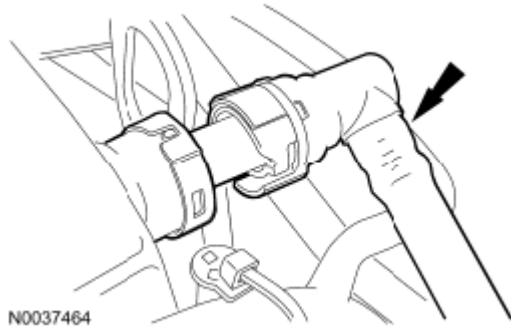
Connecting Crankcase Vent Tube To Valve Cover
